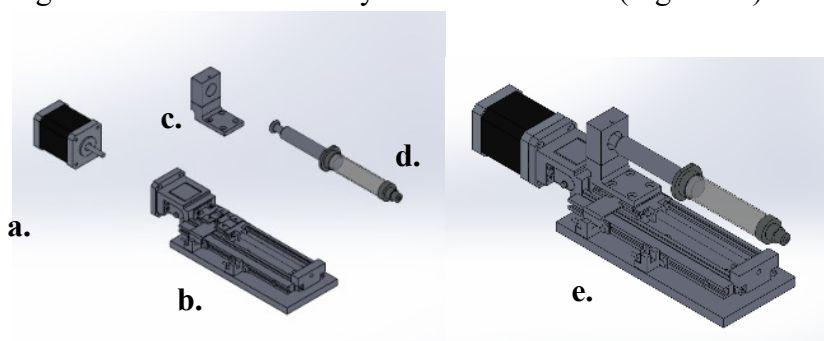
Moto-syringes developed for sampling, mixing, dosing and flushing. a. Stepper motor (Nema), b. actuator (Misumi), c. Mechanical support (Cemas), syringe, e. final assembly.
